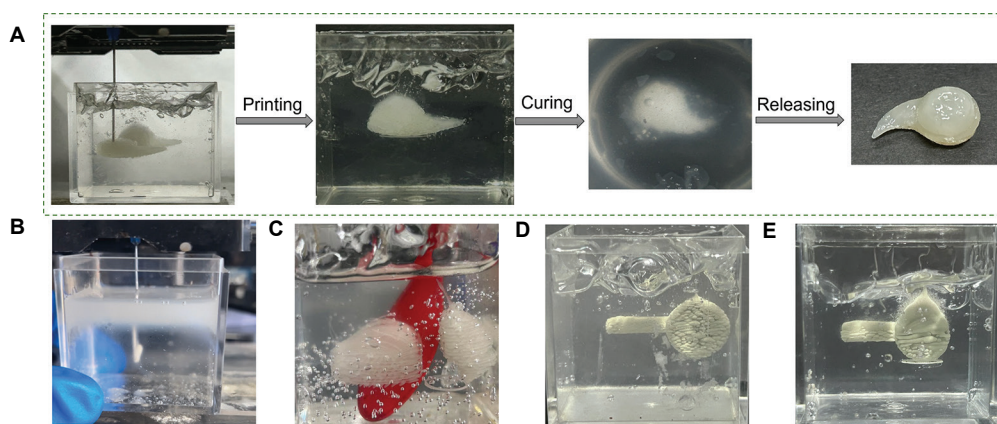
3D printing process. (A) 3D-printed earplug process. (B) Extrusion in pure carbomer solution. (C) Curing of Polydimethylsiloxane (PDMS) in carbomer. (D and E) Print structure under different printing parameters: Printing with 80% fill density (D); and with other parameters unchanged, the upper layer: 0.15 mm layer height, and the lower layer: 0.20 mm layer height (E)
